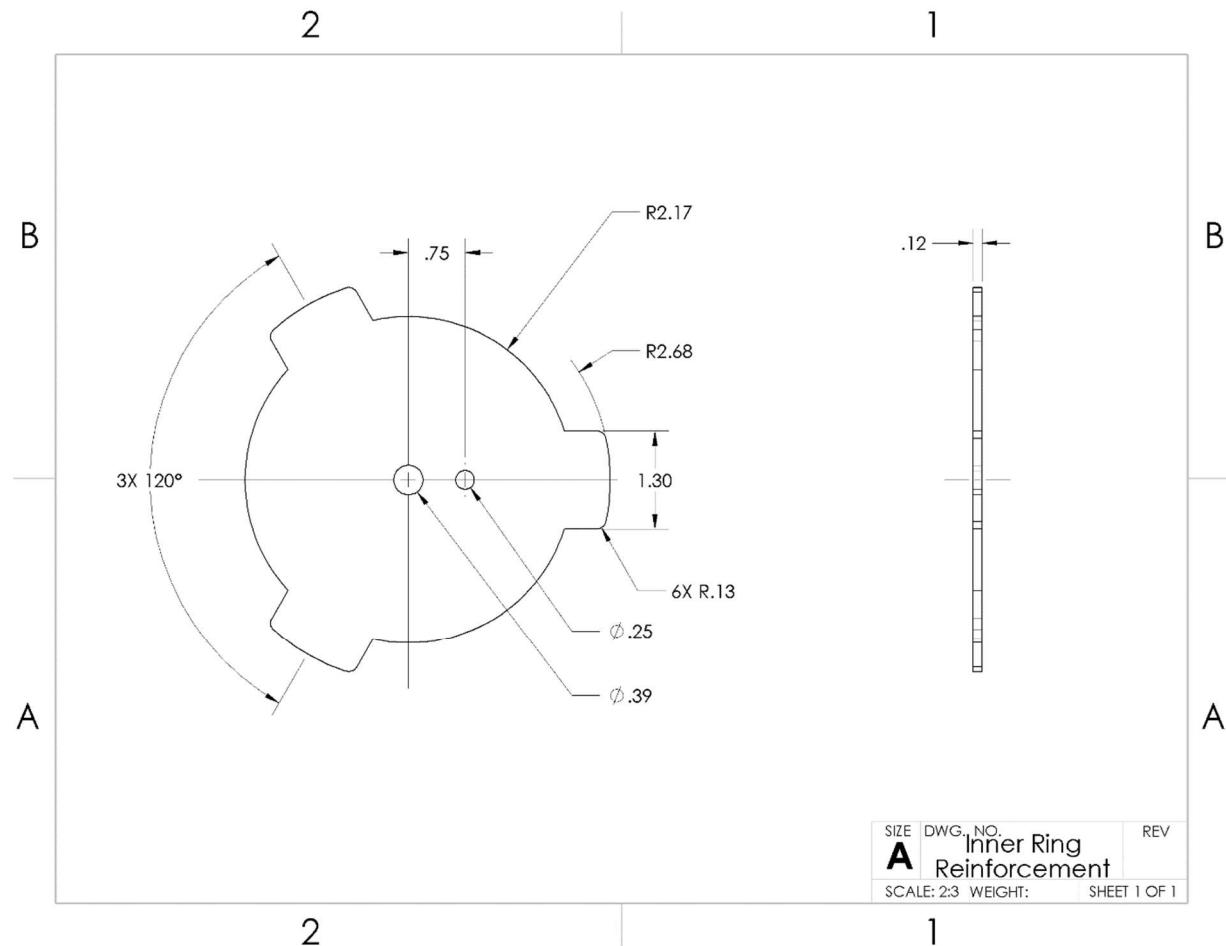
Locking Mechanism Inner Ring Reinforcement Drawing
